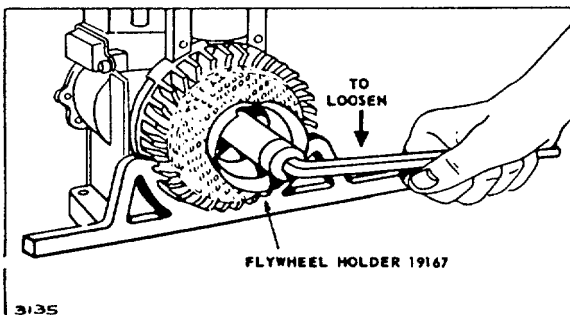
Loosen Flywheel, Rope Starter (1/2" Dia. Threads)
